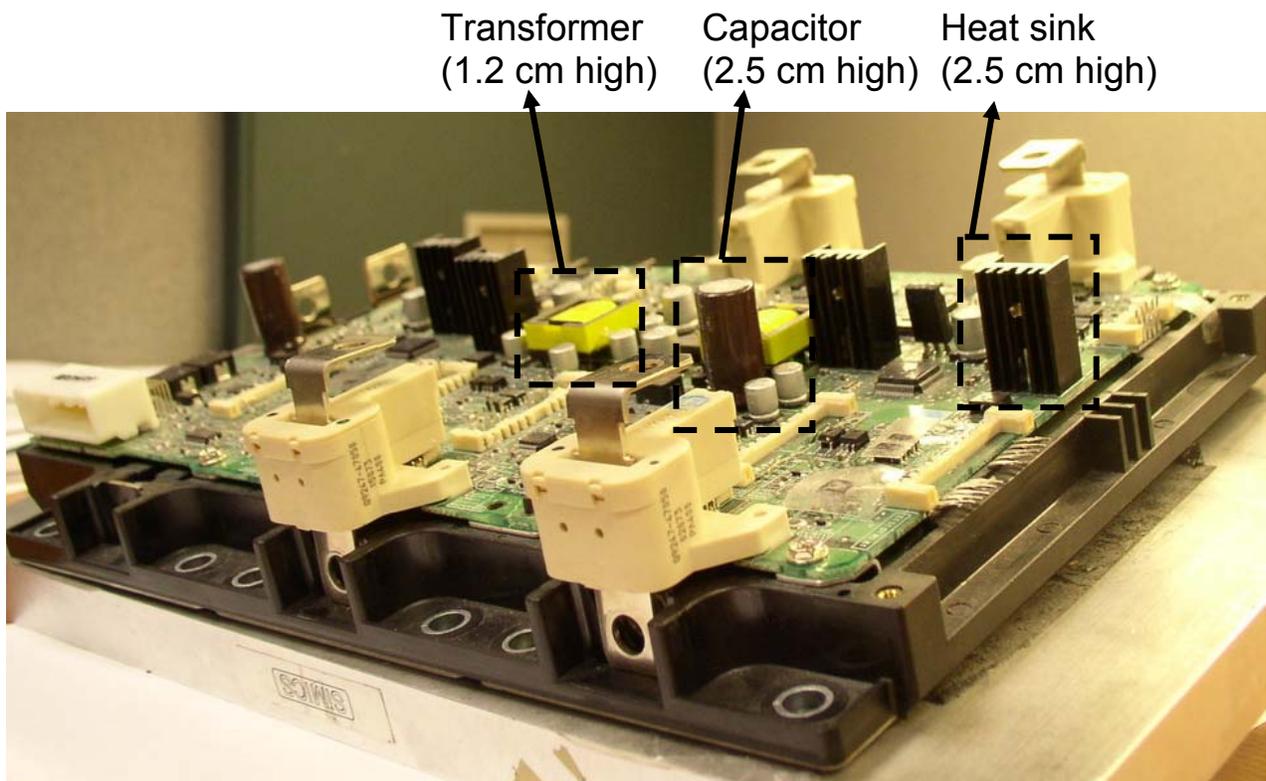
Numerous electronic components on a PCB such as transformers, capacitors, and heat sinks, are 1.2 to 2.5 cm high. These make the wireless communication on the PCB challenging.
